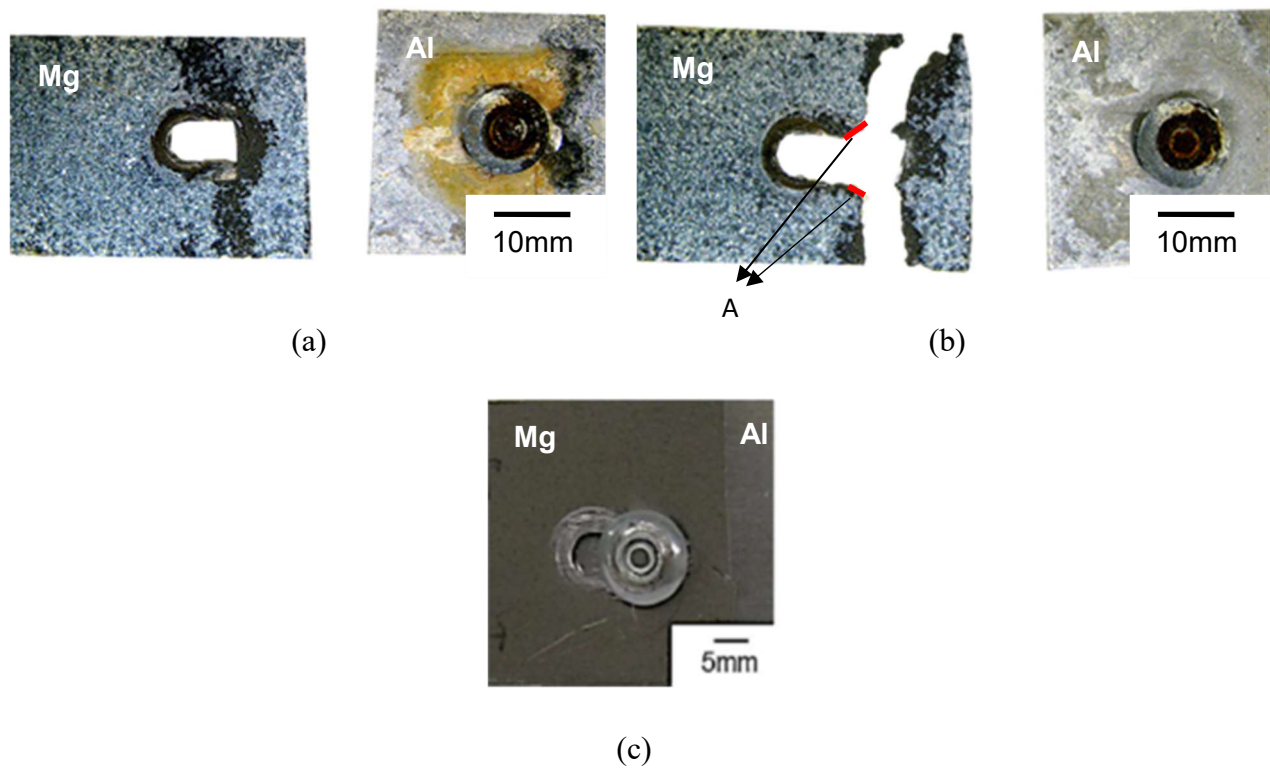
(a) Image of an exposed Mg/Al joint in bearing followed by rivet pullout; (b) image of an exposed Mg/Al joints in bearing followed by tension failure mode; and (c) image of as-fabricated FSBR Mg/Al joints in bearing by cleavage failure
